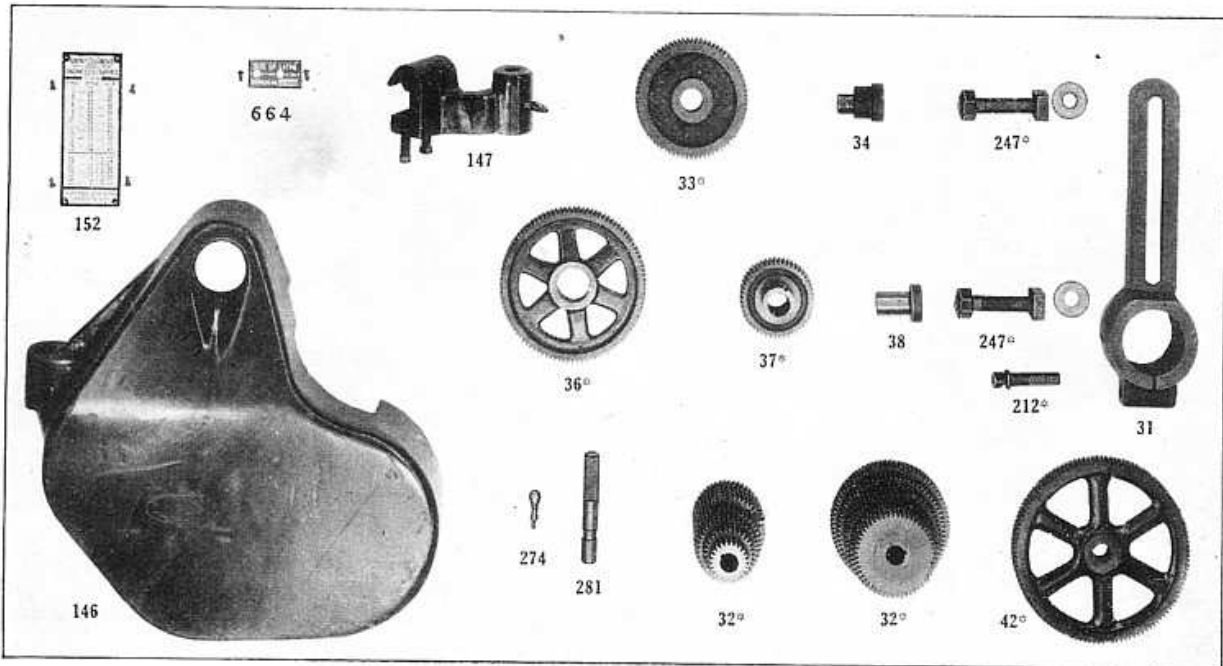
Standard Change Gear Parts for South Bend Standard Change Gear Lathes.
